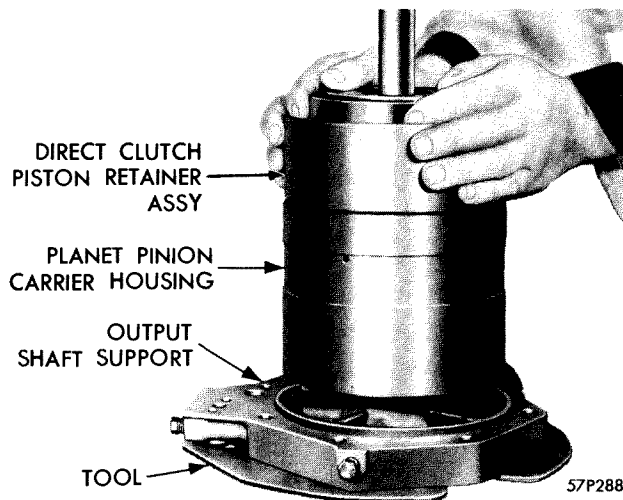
Installation of Direct Clutch Piston Retainer Assembly
